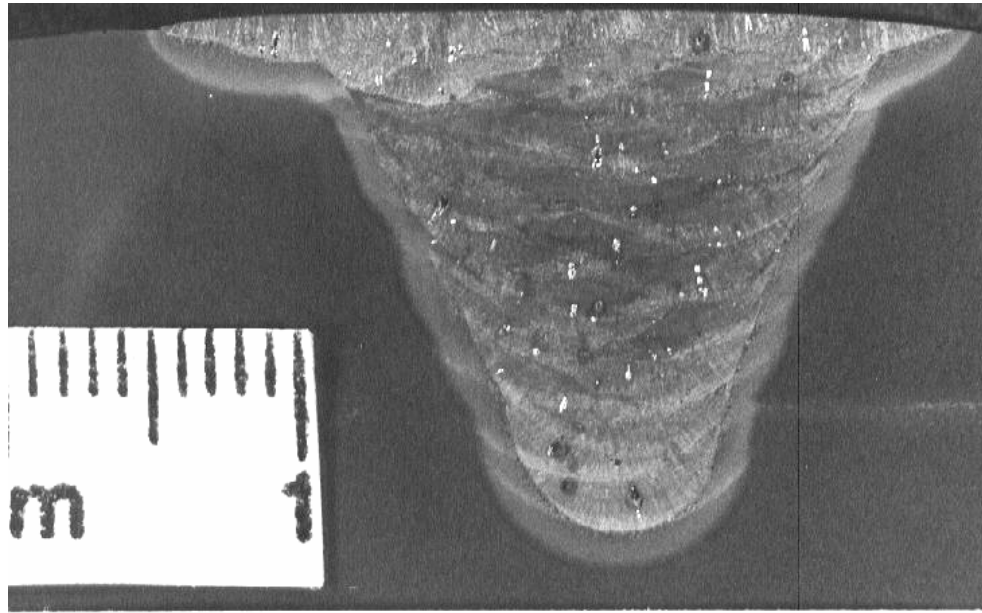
Macro-section and top bead microstructure from 2T3B3 V-groove weld.
